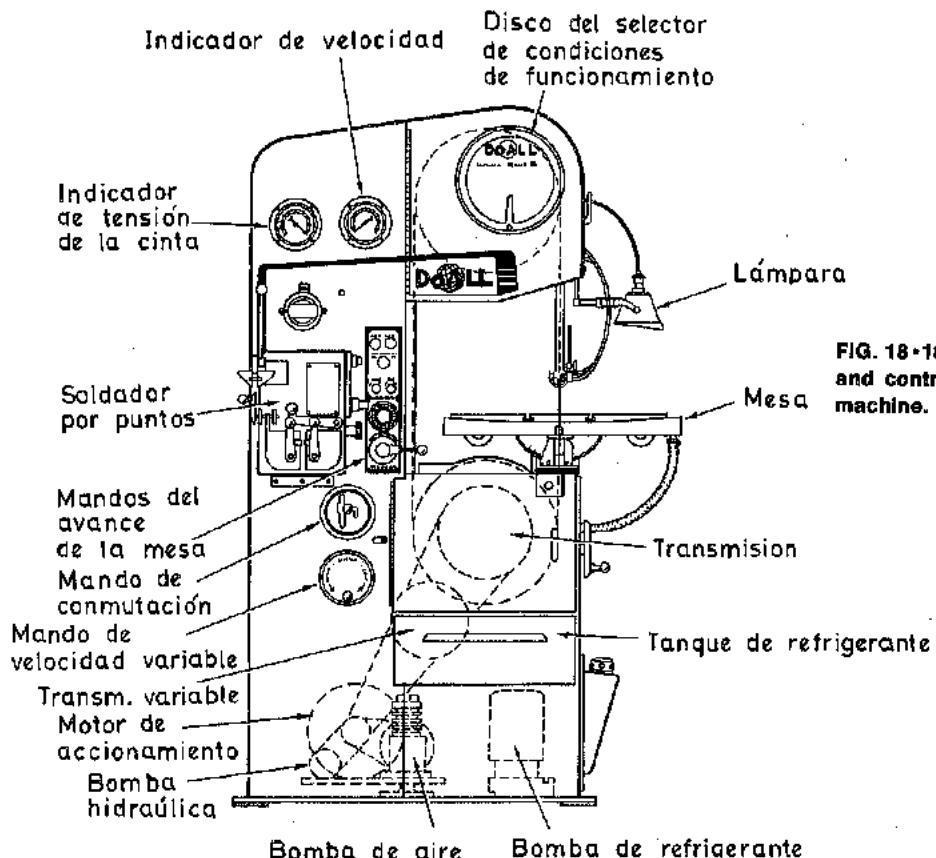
Transmission and controls of a 16" band machine. (DoAll Co.)
